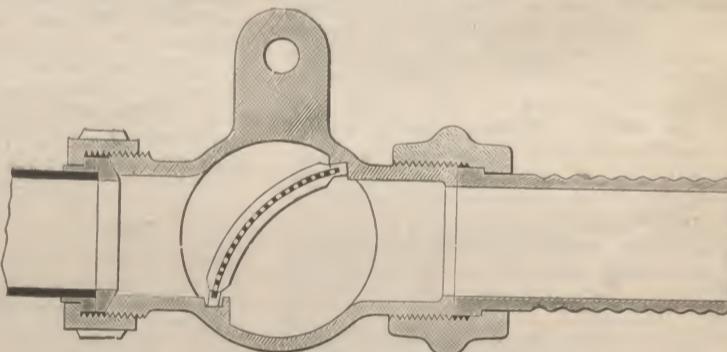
SECTIONAL VIEW SHOWING STRAINER.
